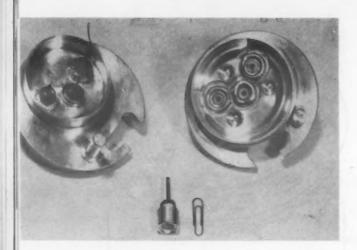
Header, next to paper clip, is composed of 42% nickel-iron cap and aluminum bushing hermetically sealed to alumina ceramic insulator. Two views are shown of final assembly with three headers in place.
